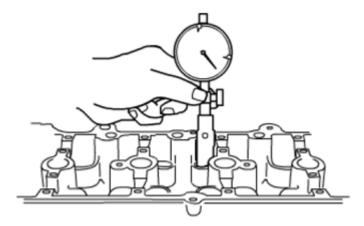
Checking Valve Guide Inside Diameter Courtesy of SUZUKI OF AMERICA CORP.
